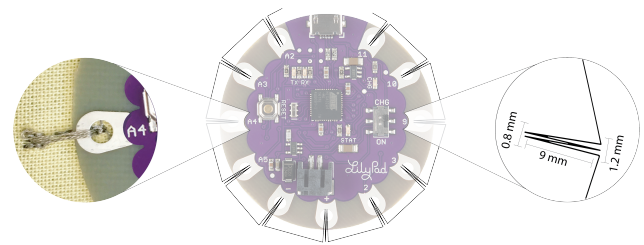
1. Component Stickers represent electrical components in a hand-sketch circuit. Pin grooves designed to enlarge component contact area. 2. Stickers replaced with hardware counterparts after embroidery.
